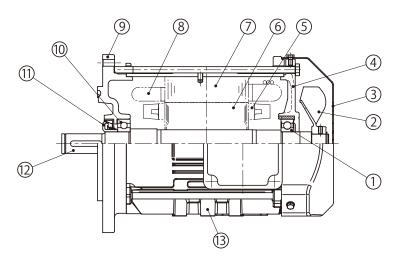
Direct-coupled motor for CYCLO Drive (Sealed bearing, oil seal structure) (Example: N-100L 2.2kW 4P)
